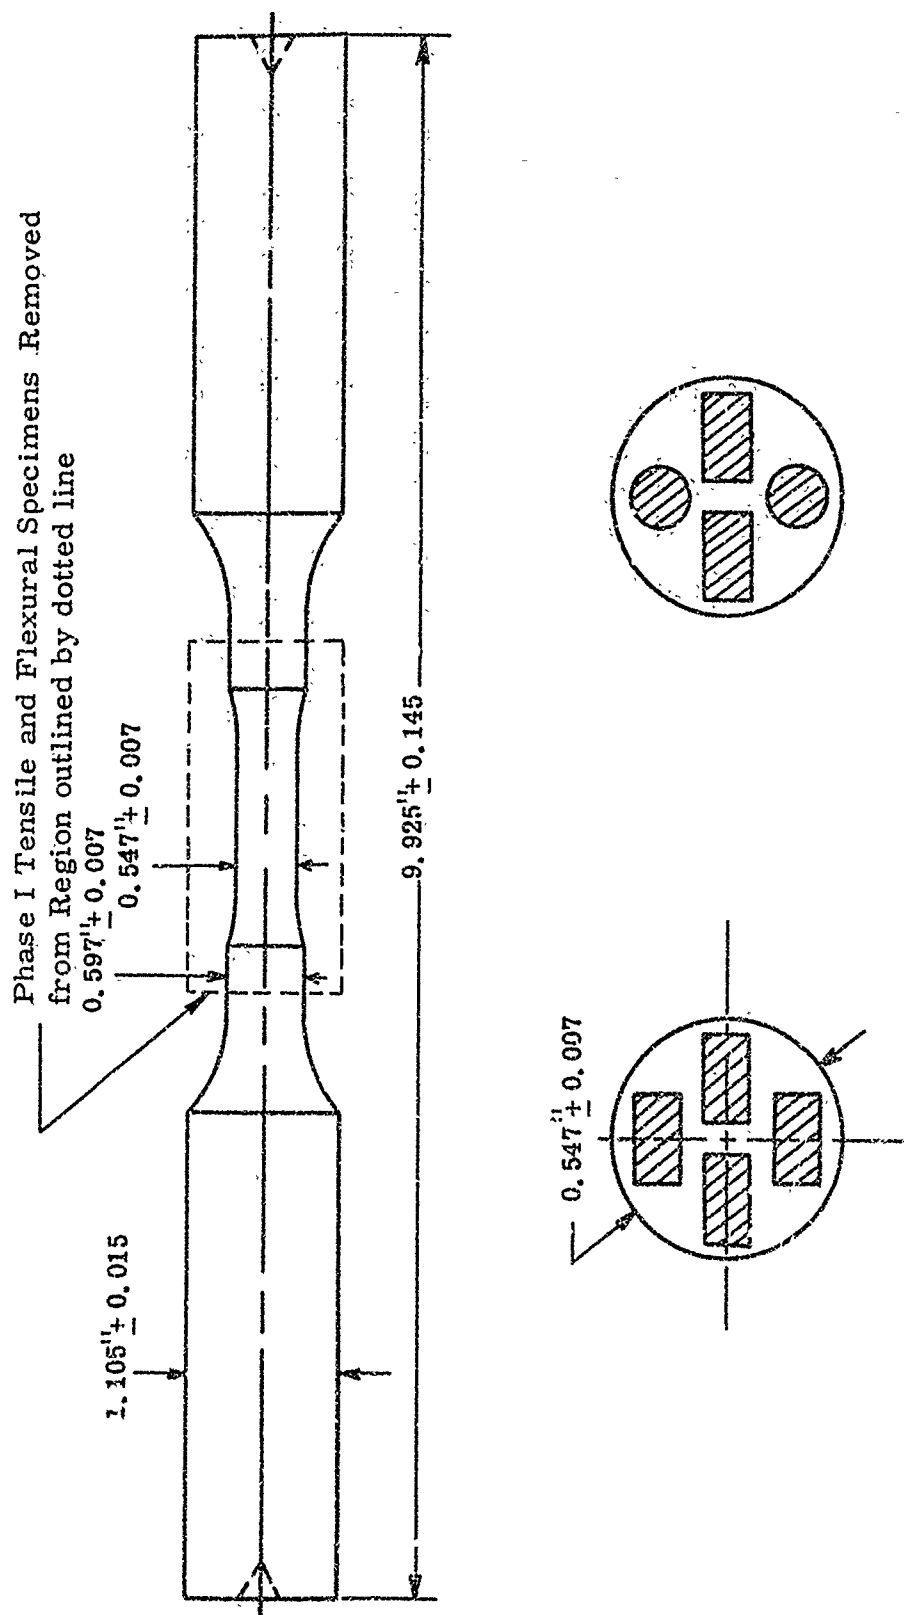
Configuration of Specimen Blanks 2A04 as Received from Coors and Cutting Plan for Removing Phase I Tensile and Flexure Specimens.
